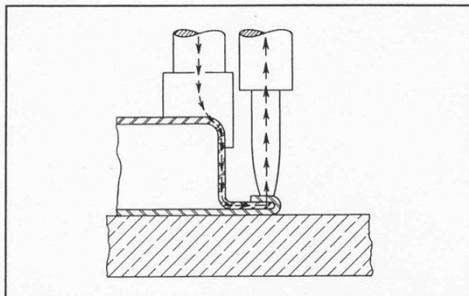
Spot-welded assembly showing a typical joint design for an indirect weld.
